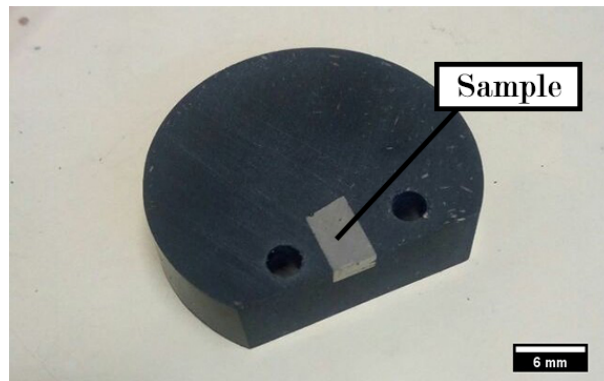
Bakelite puck with ECAP sample mounted for micromilling experiments.
